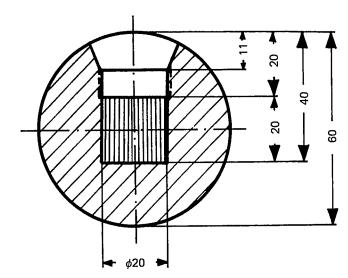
Sectional view of boron absorber element (dimensions in millimetres).
